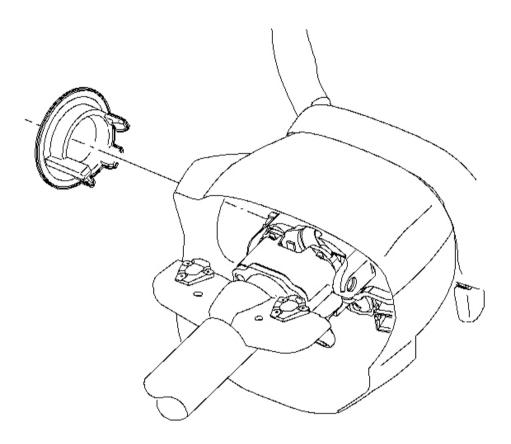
Ignition Switch Bezel Courtesy of GENERAL MOTORS CORP.
